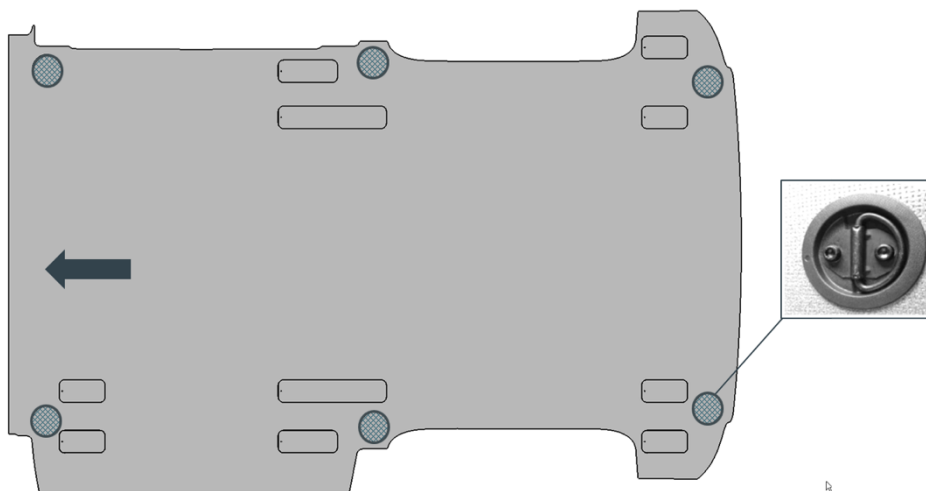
Universal floor (5BM) – plate-shaped mounting points at the lashing points
